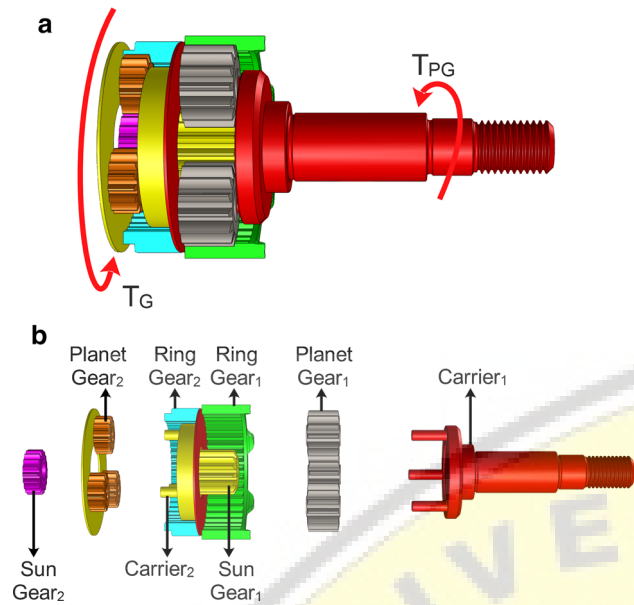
a Overall structure of the planetary gears; b the exploded view of the planetary gears
